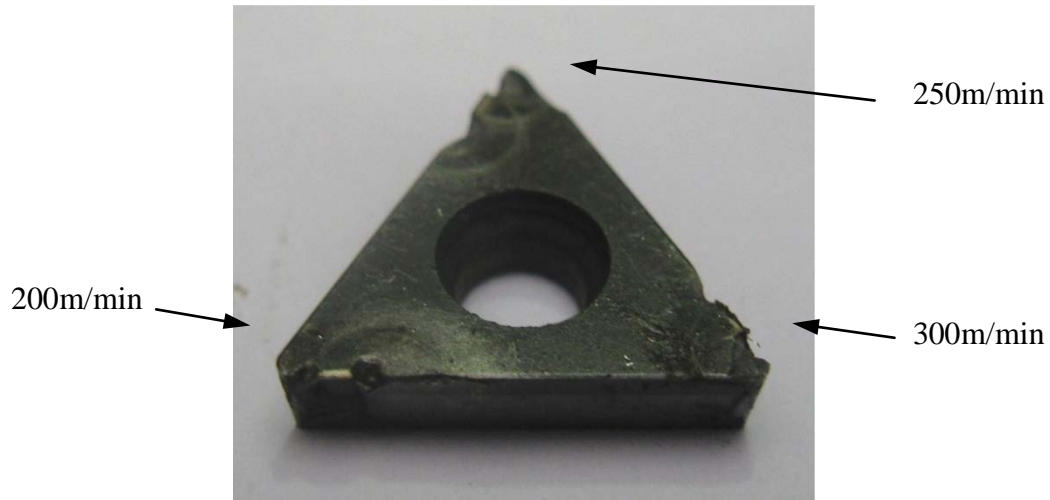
High tool wear/damage evidenced following machining of Inconel 718 at various cutting speeds and a feed of 0.2mm/rev.
